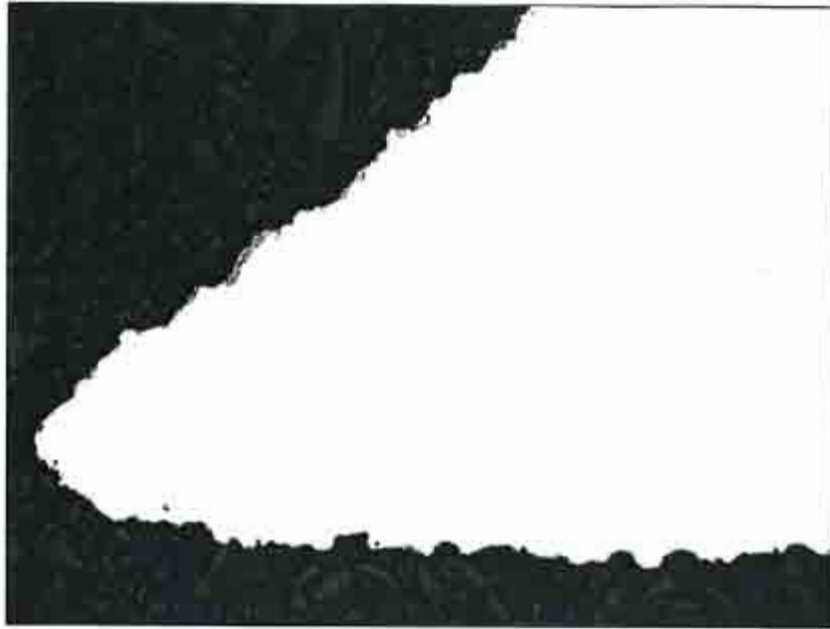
Photograph at 50x showing the thicker fracture surface profile at the ID surface; as polished.
